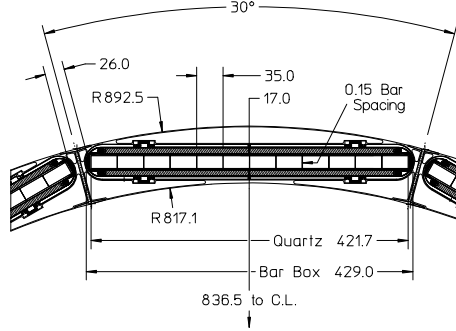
Transverse section of the DIRC bar arrangement with dimensions in mm.
